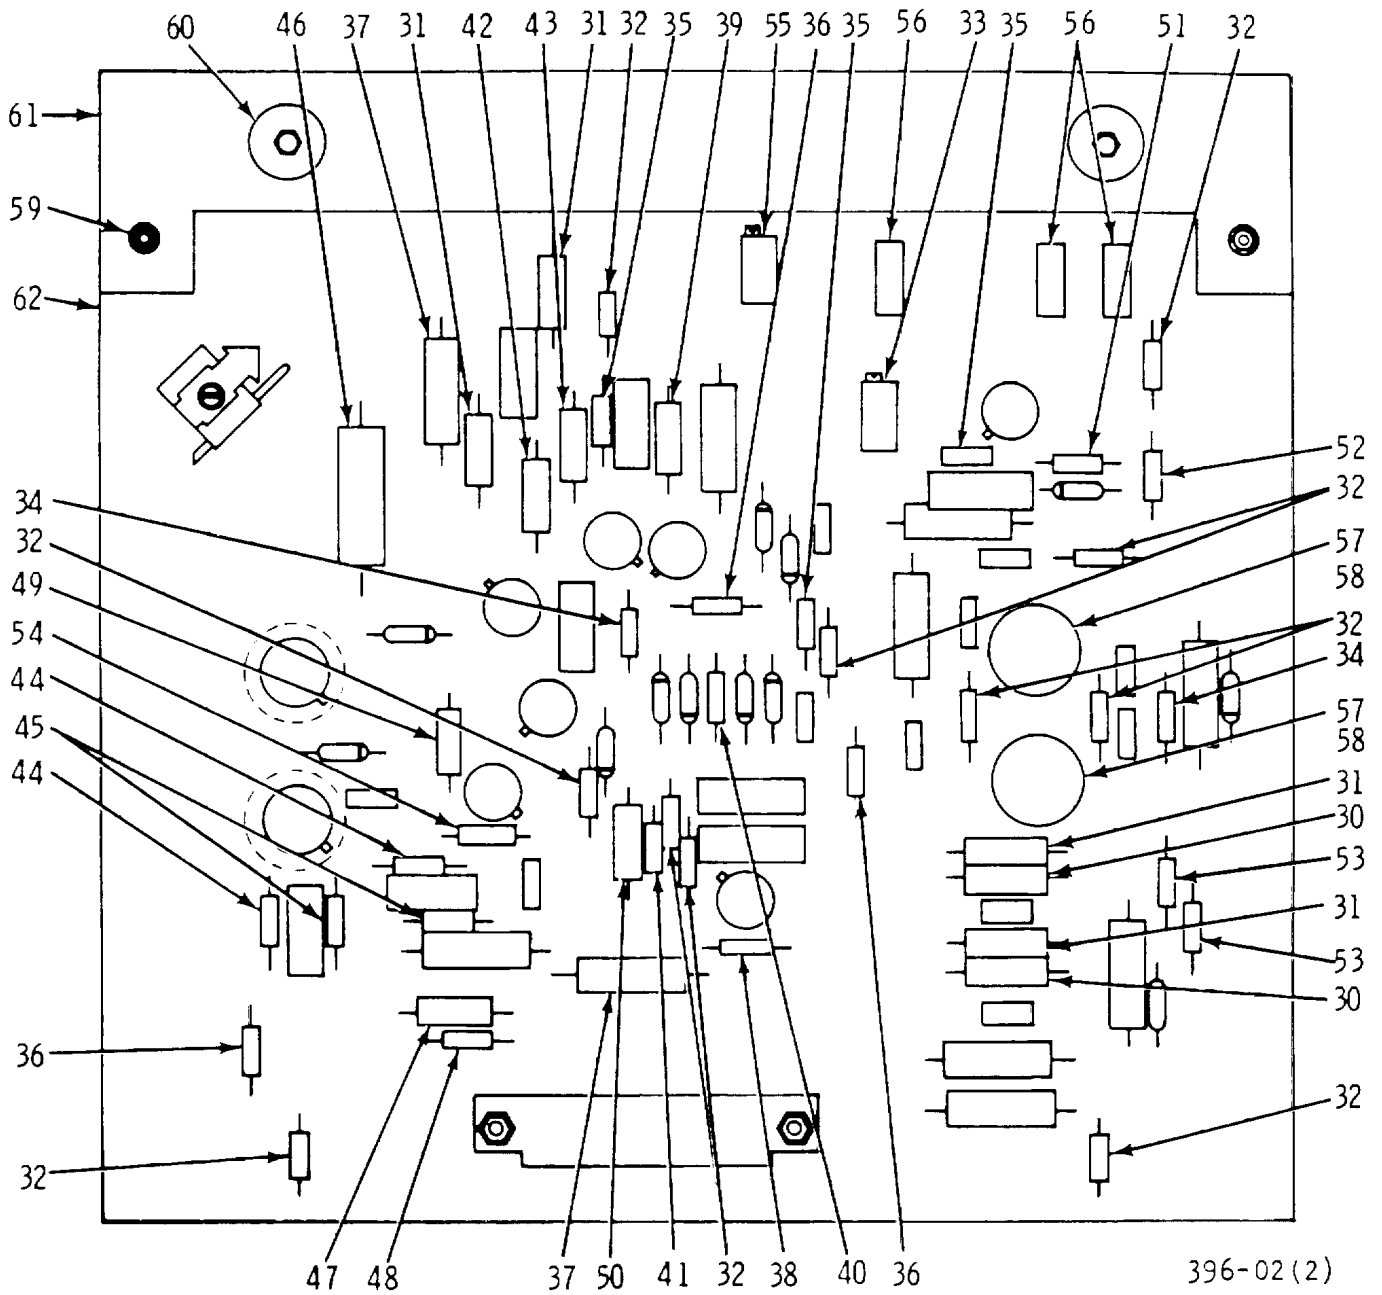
Circuit Card Assembly, Video Amplifier A1 (Sheet 2 of 2)
